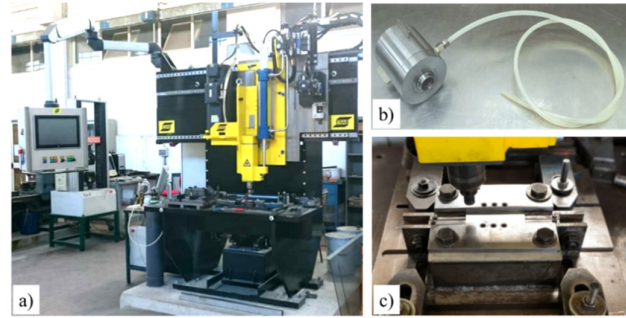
(a) ESAB Legio 3st machine with (b) argon chamber tool and (c) Clamp fixture.
